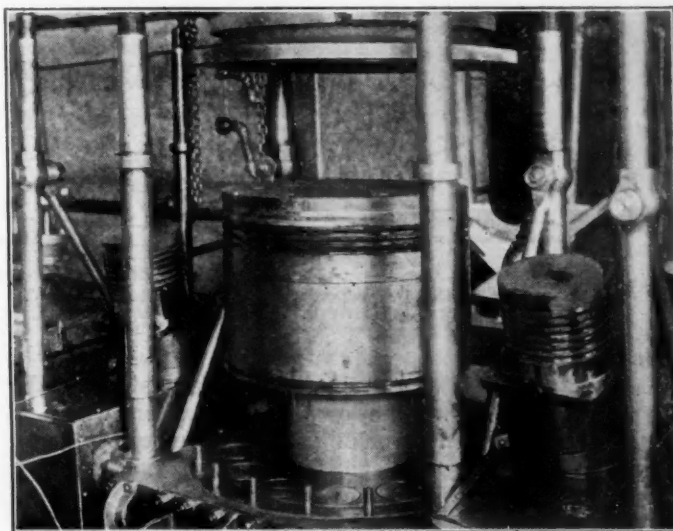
VIEW OF THE ENGINE ILLUSTRATED IN FIG. 26 DISMANTLED, SHOWING THE TWO HIGH-PRESSURE PISTONS, THE LOW-PRESSURE PISTON AND THE TRUNK EXTENSION
